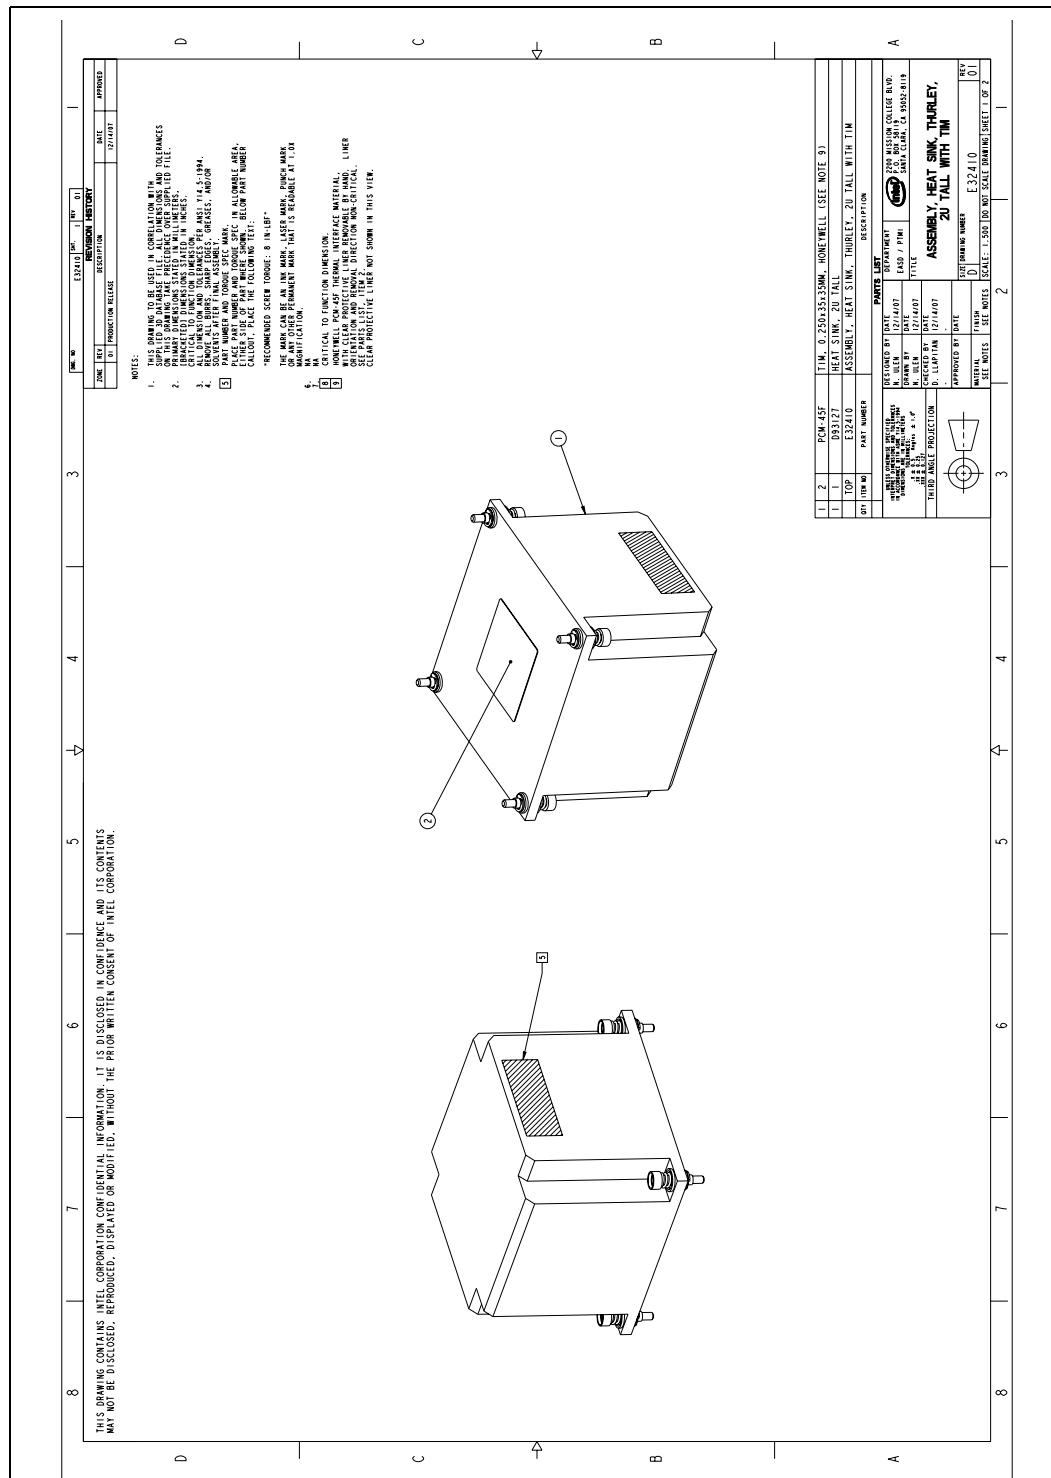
2U Reference Heatsink Assembly with TIM (Sheet 2 of 2)
